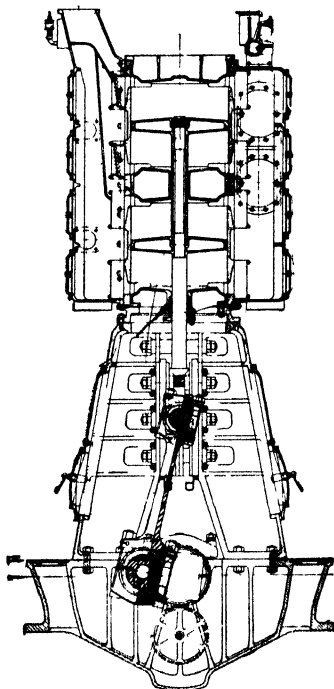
Typical Frame Construction of Cross-head Type Engines
